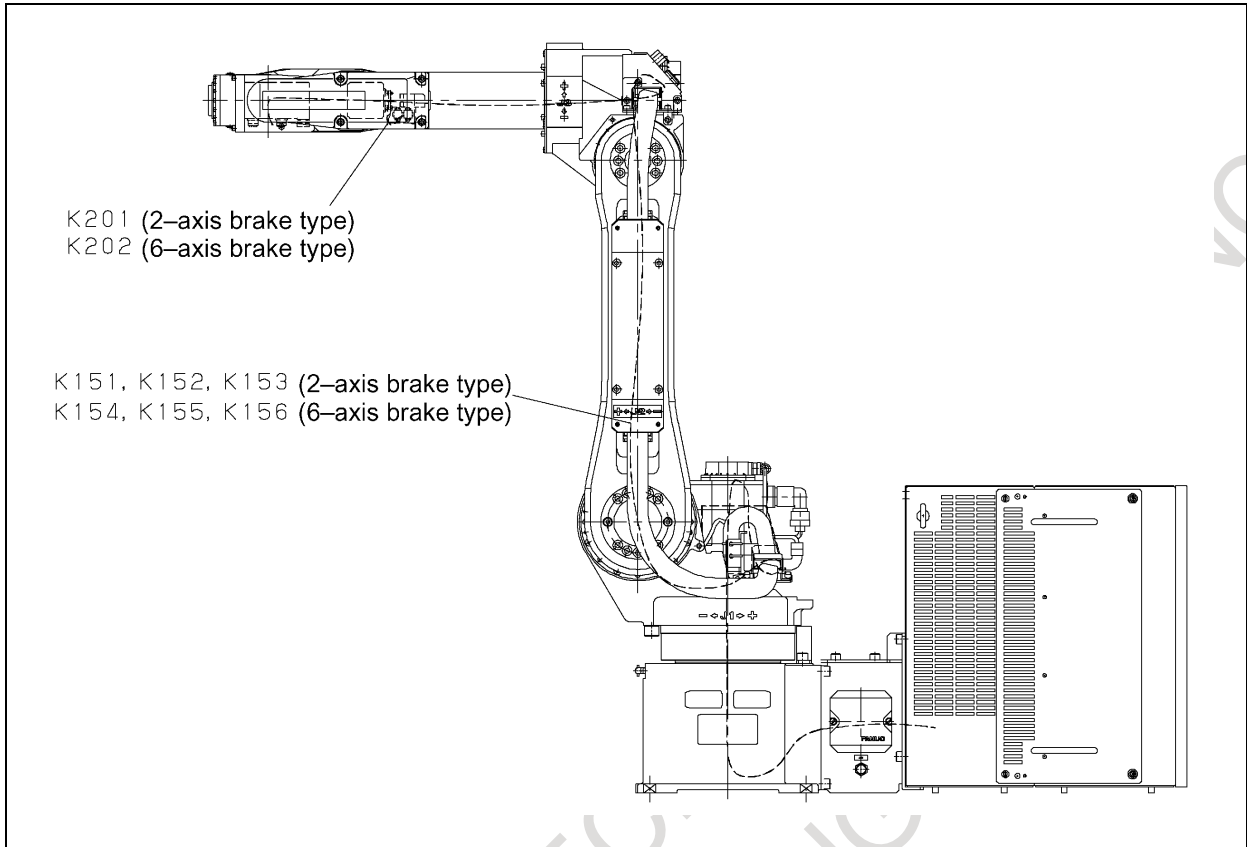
(b) Cables in the mechanical unit (Integrated type controller) ARC Mate 100iB, M-6iB
